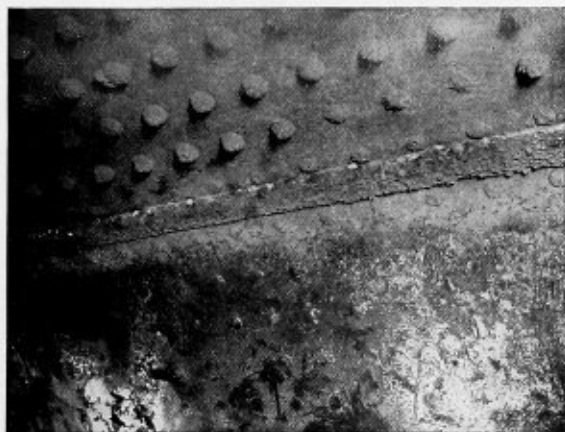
Corroded Seam After Having Been Repaired by Electric Welding
